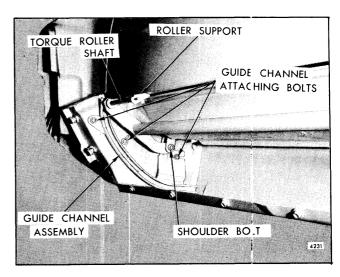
Tail Gate Guide Channel Assembly - Left
